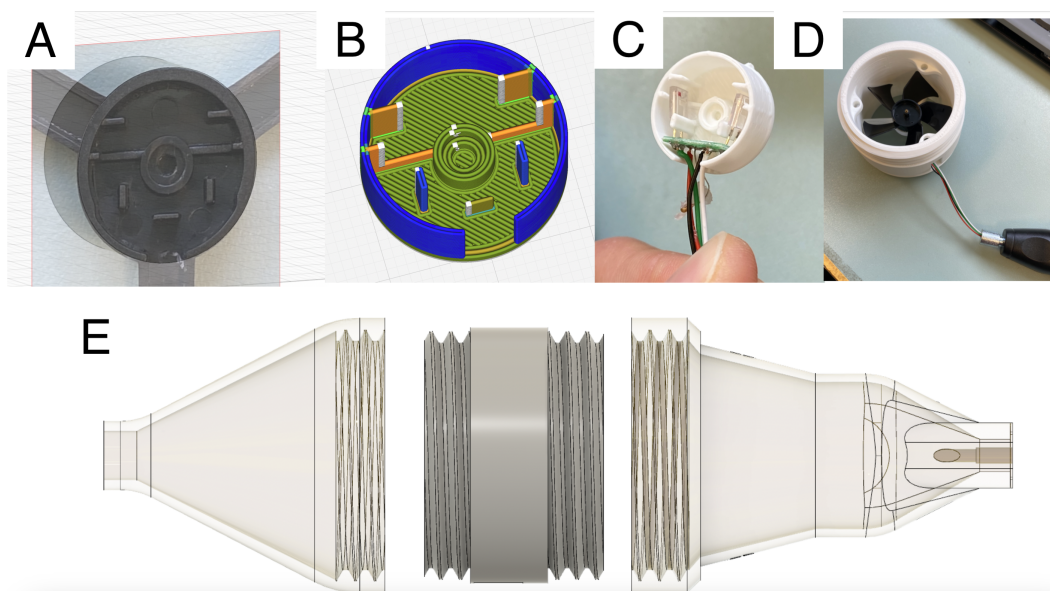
Design and fabrication of custom anemometer housing. a) Imported image of original vane anemometer housing. b) 3D model prepared for FDM printing via slicing software. c) FDM 3D printed construct fitting with optical sensor. d) Assembled anemometer unit with vane in place. e) Side view of entire anemometer component assembly.
